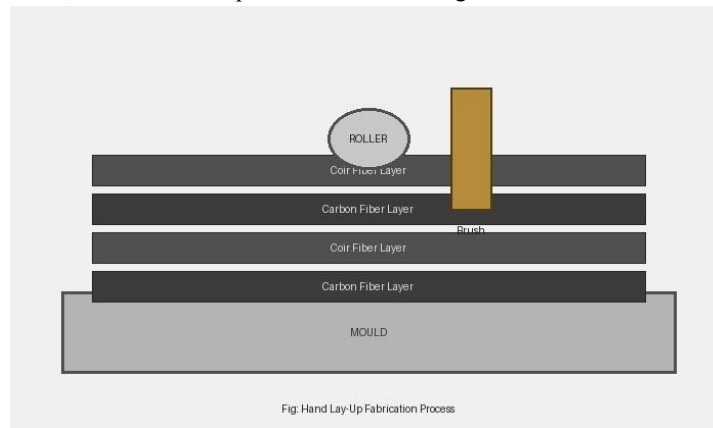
Hand Layup Fabrication Process – Fiber Ply Stacking, Resin Application, and Roller Consolidation
